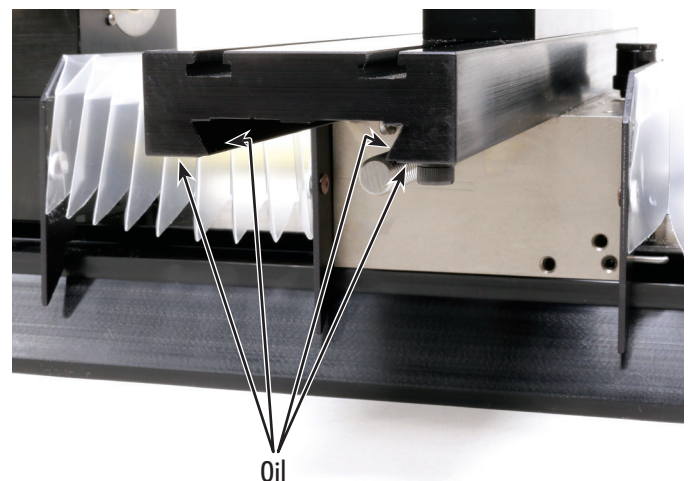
The arrows indicate the surfaces underneath the table where oil should be applied.
